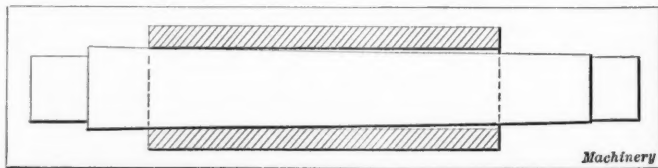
Improper Fit of Bushing on Ordinary Arbor
